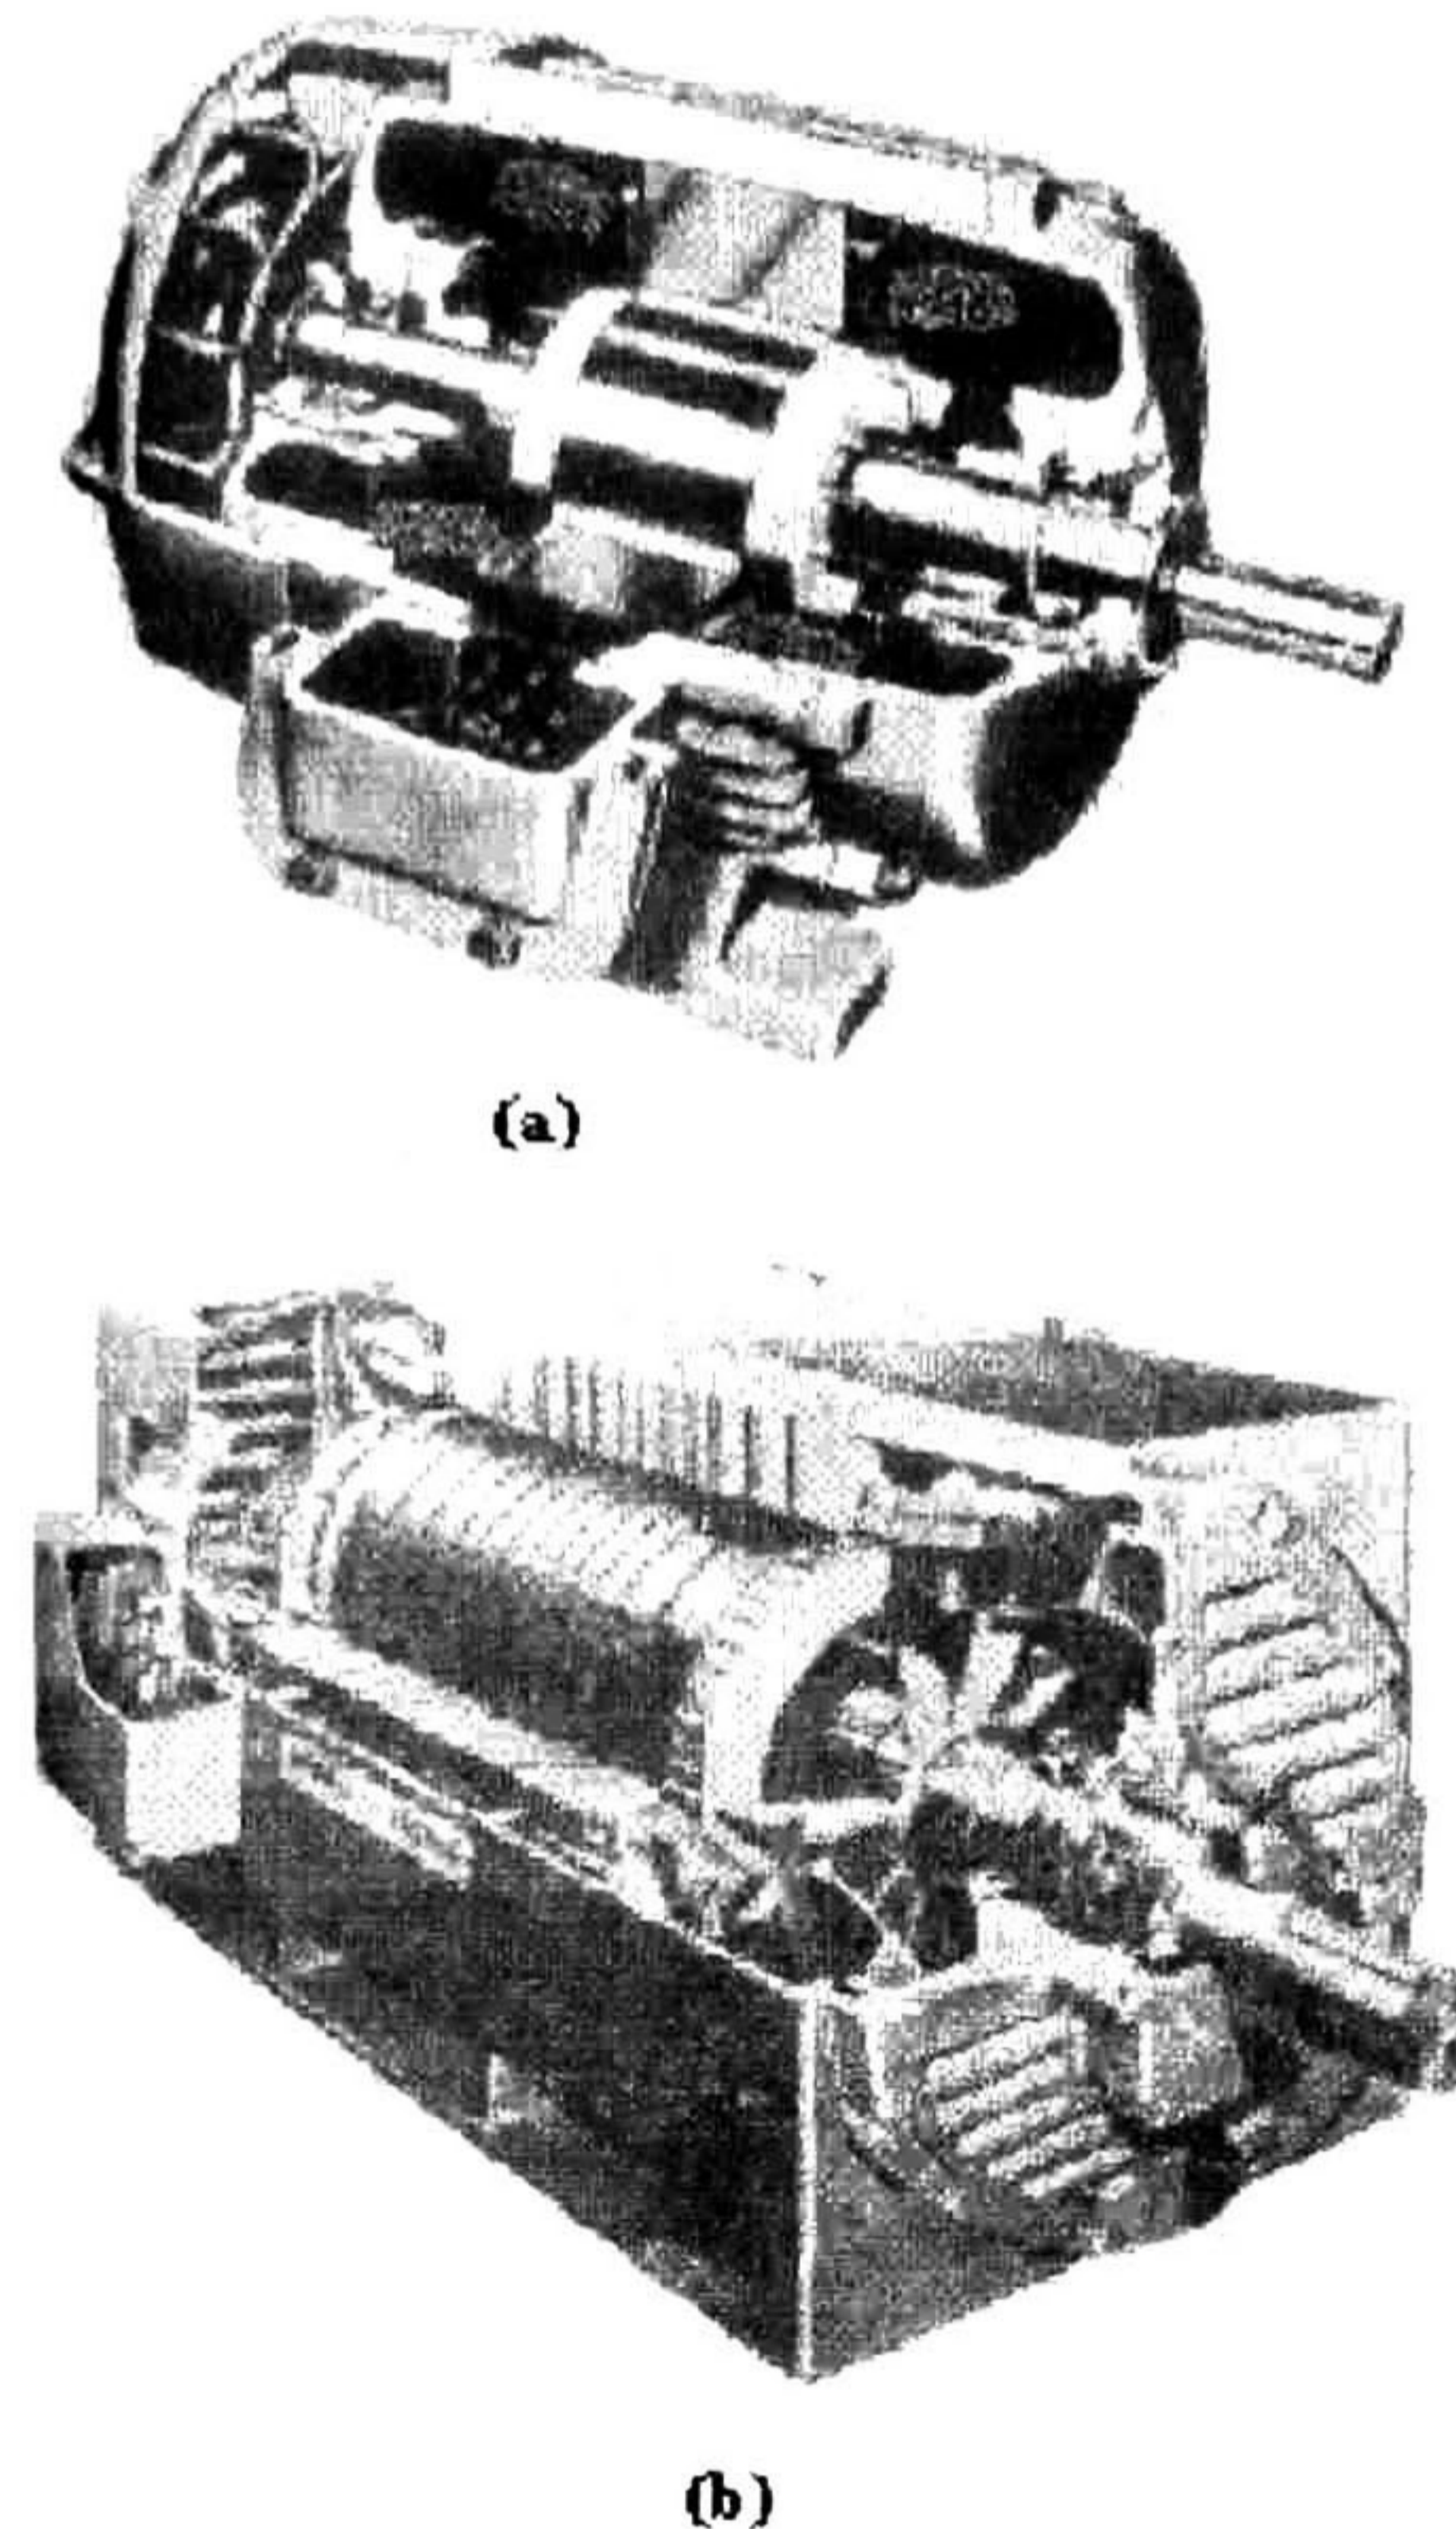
(a) An inside view of a typical small squirrel cage rotor of an induction motor.
